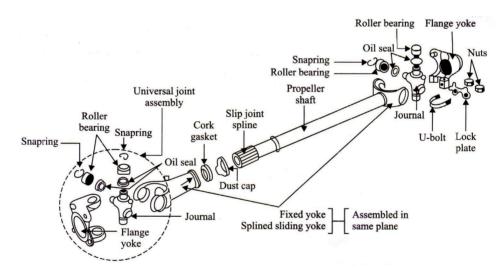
Exploded view of various components of Propeller shaft and Universal Joint.
